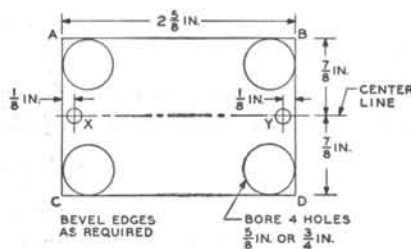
METHOD OF PREPARING RECESS HOLE FOR 391A JACK
